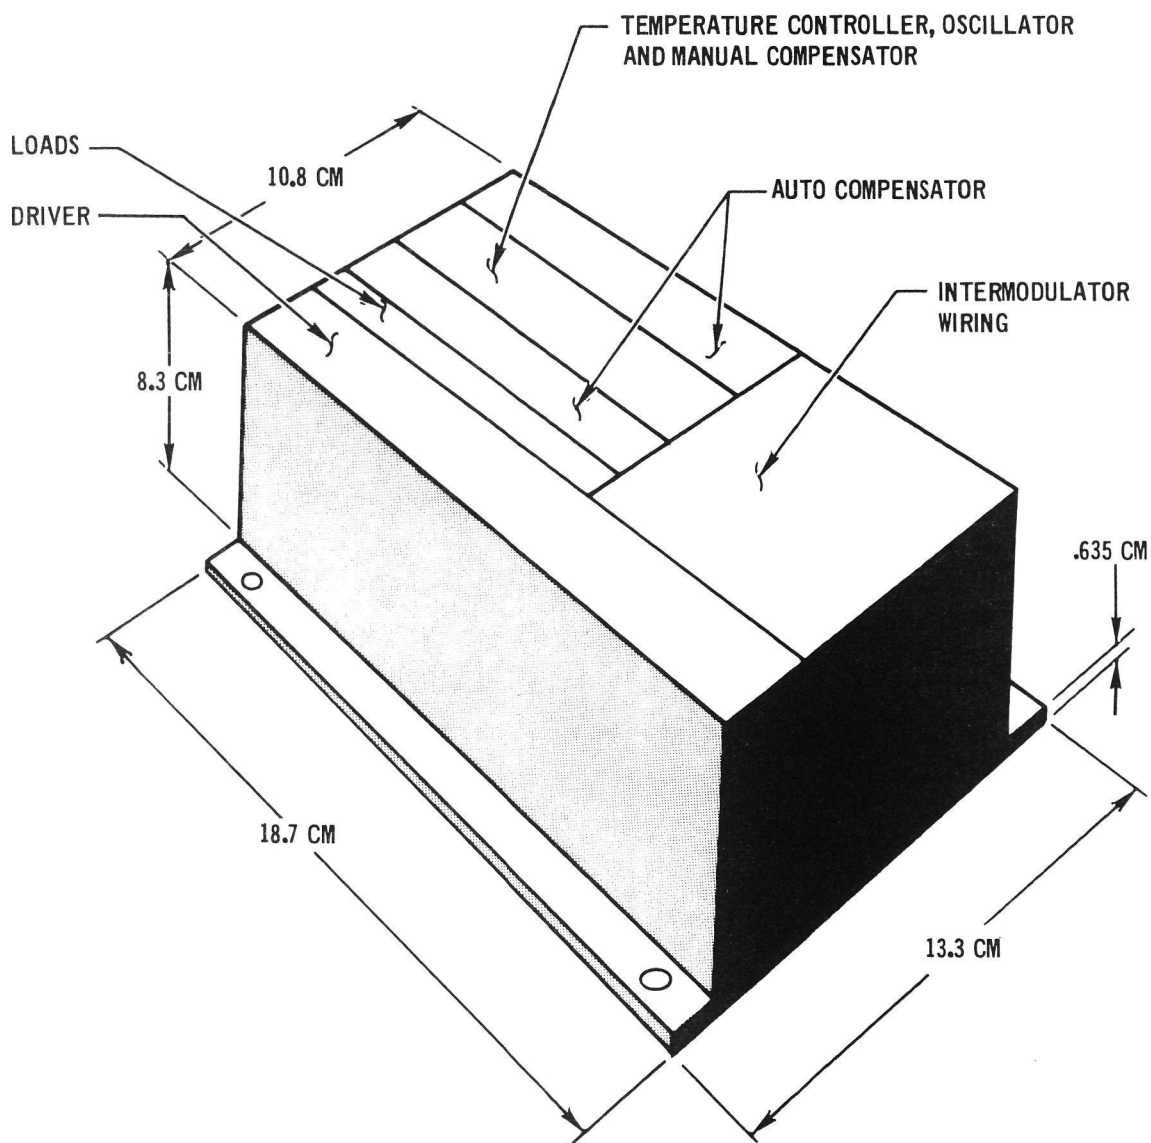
ELECTRONIC ASSEMBLY OUTLINE DRAWING
